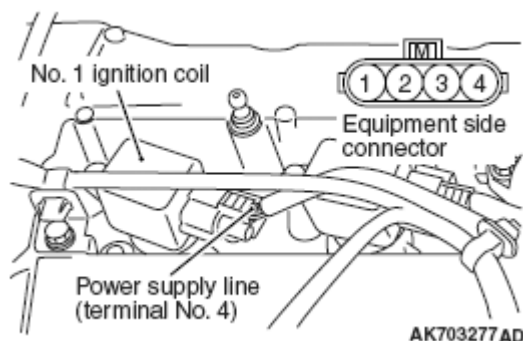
No. 1 Ignition Coil & Equipment Side Connector
